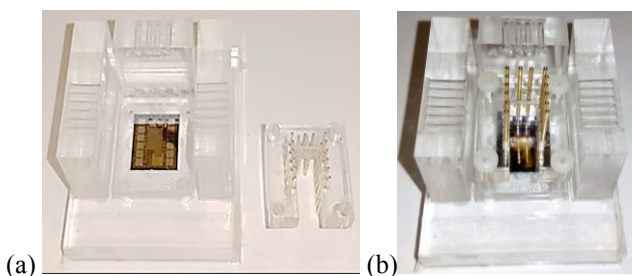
(a) Laser-fabricated holder for probing electrodes, (b) The holder after assembly.
